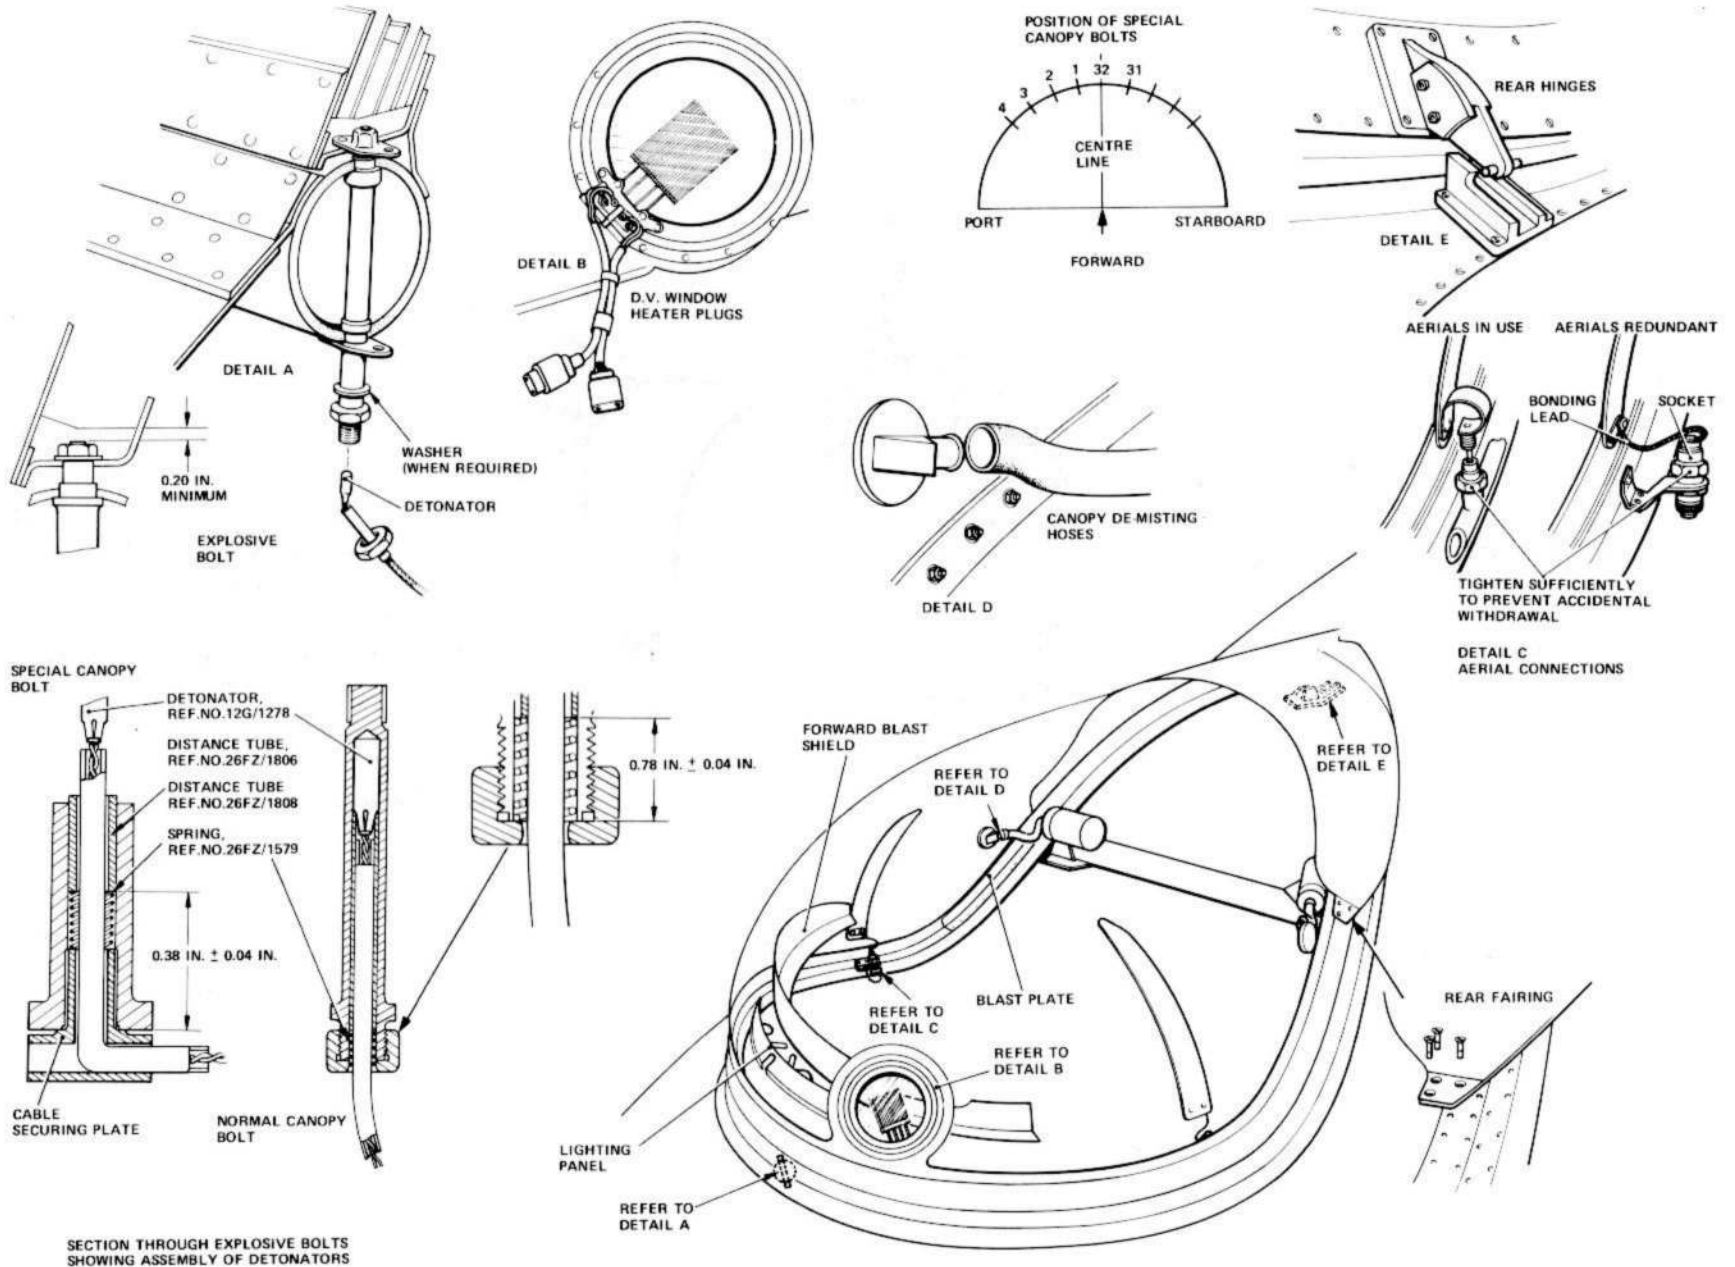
CANOPY-REMOVAL AND ASSEMBLY
